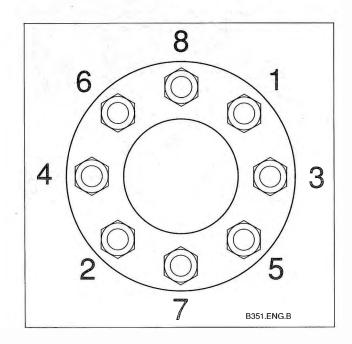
Flywheel or drive plate mounting bolt tightening sequence.
